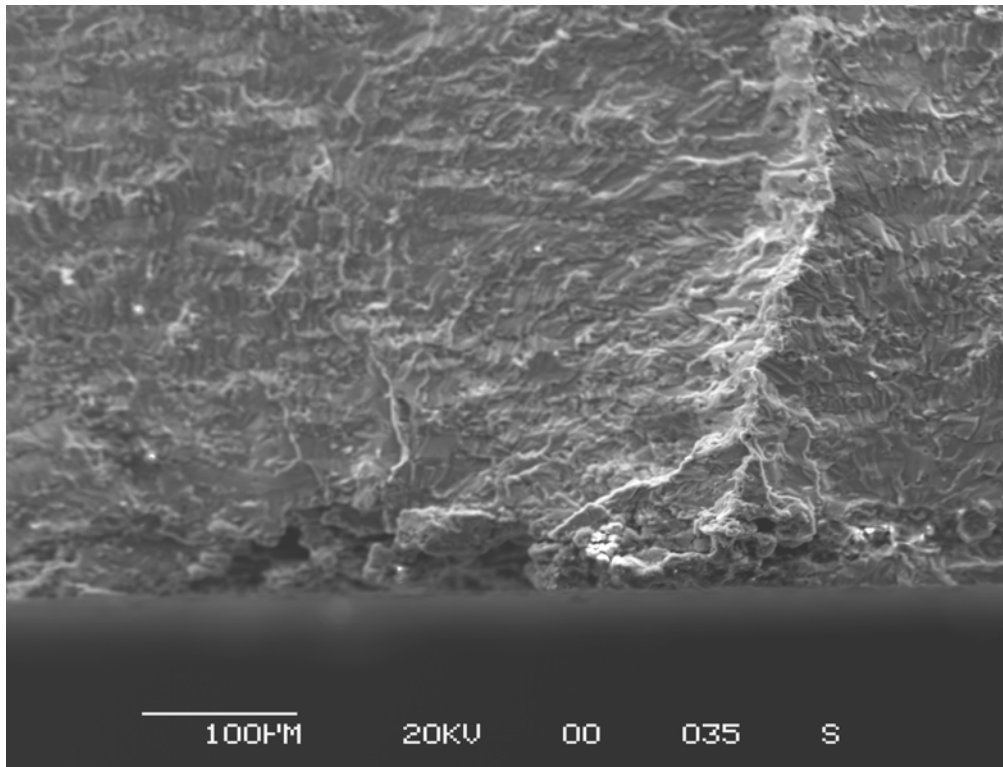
Crack Origin B (Fig. B-34) on Fracture Surface of Specimen 5877.
